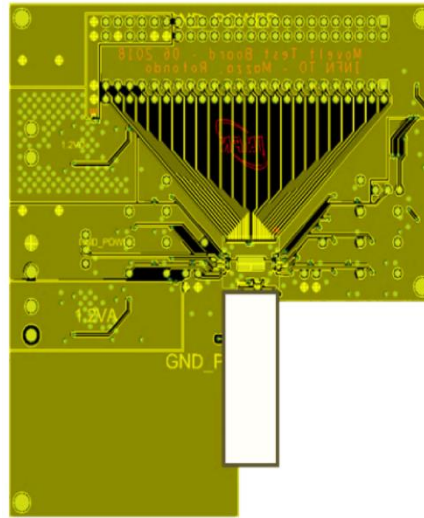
Top view of the ABACUS test board, with the strip sensor placed in the board inner
